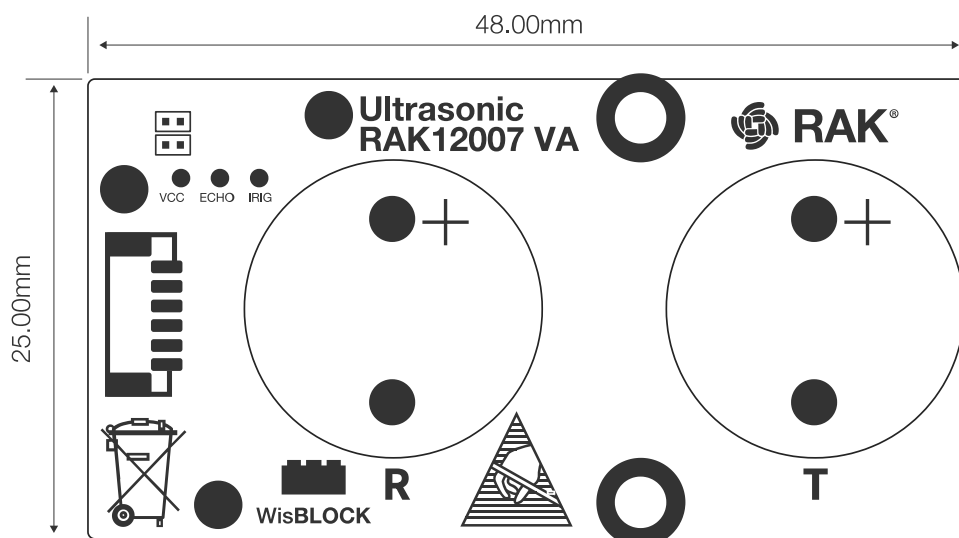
RAK12007 WisBlock Ultrasonic Sensor Mechanic Drawing
